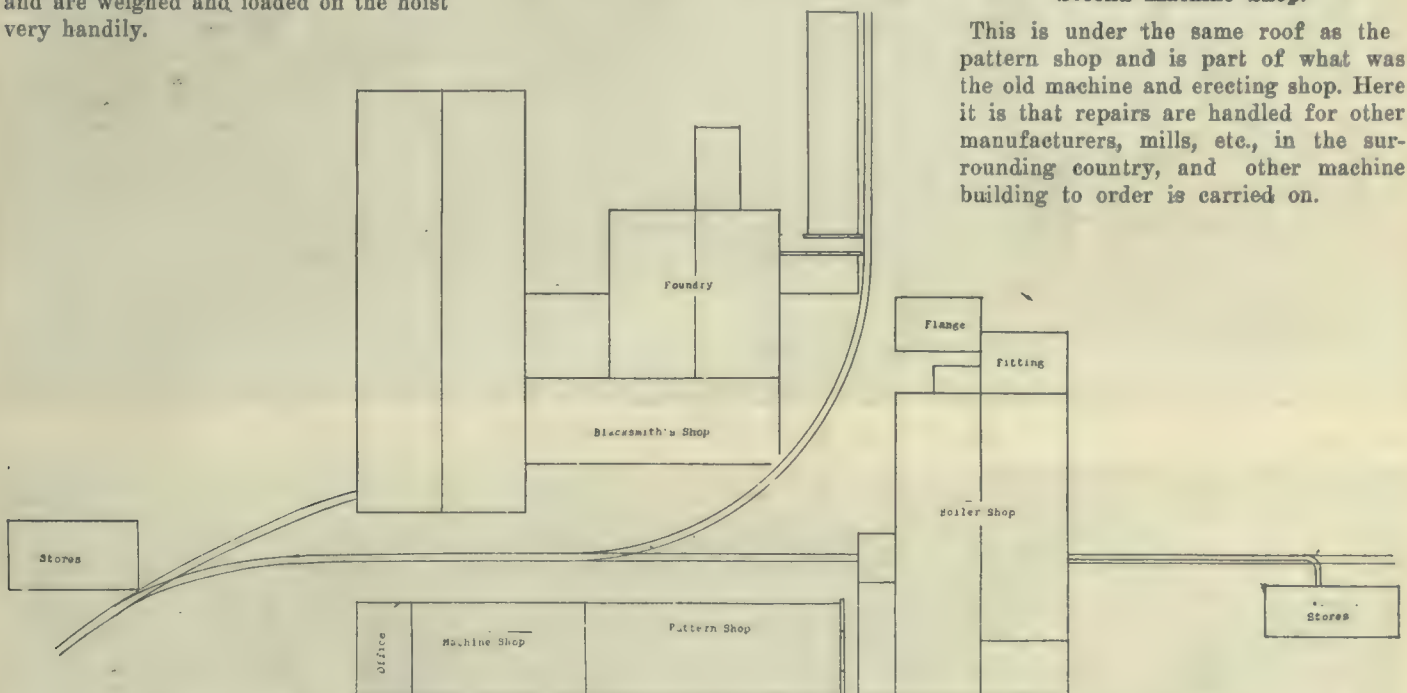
Layout Robb Engineering Works, Amherst. Large Building at the Upper Left Side is Machine Department.
